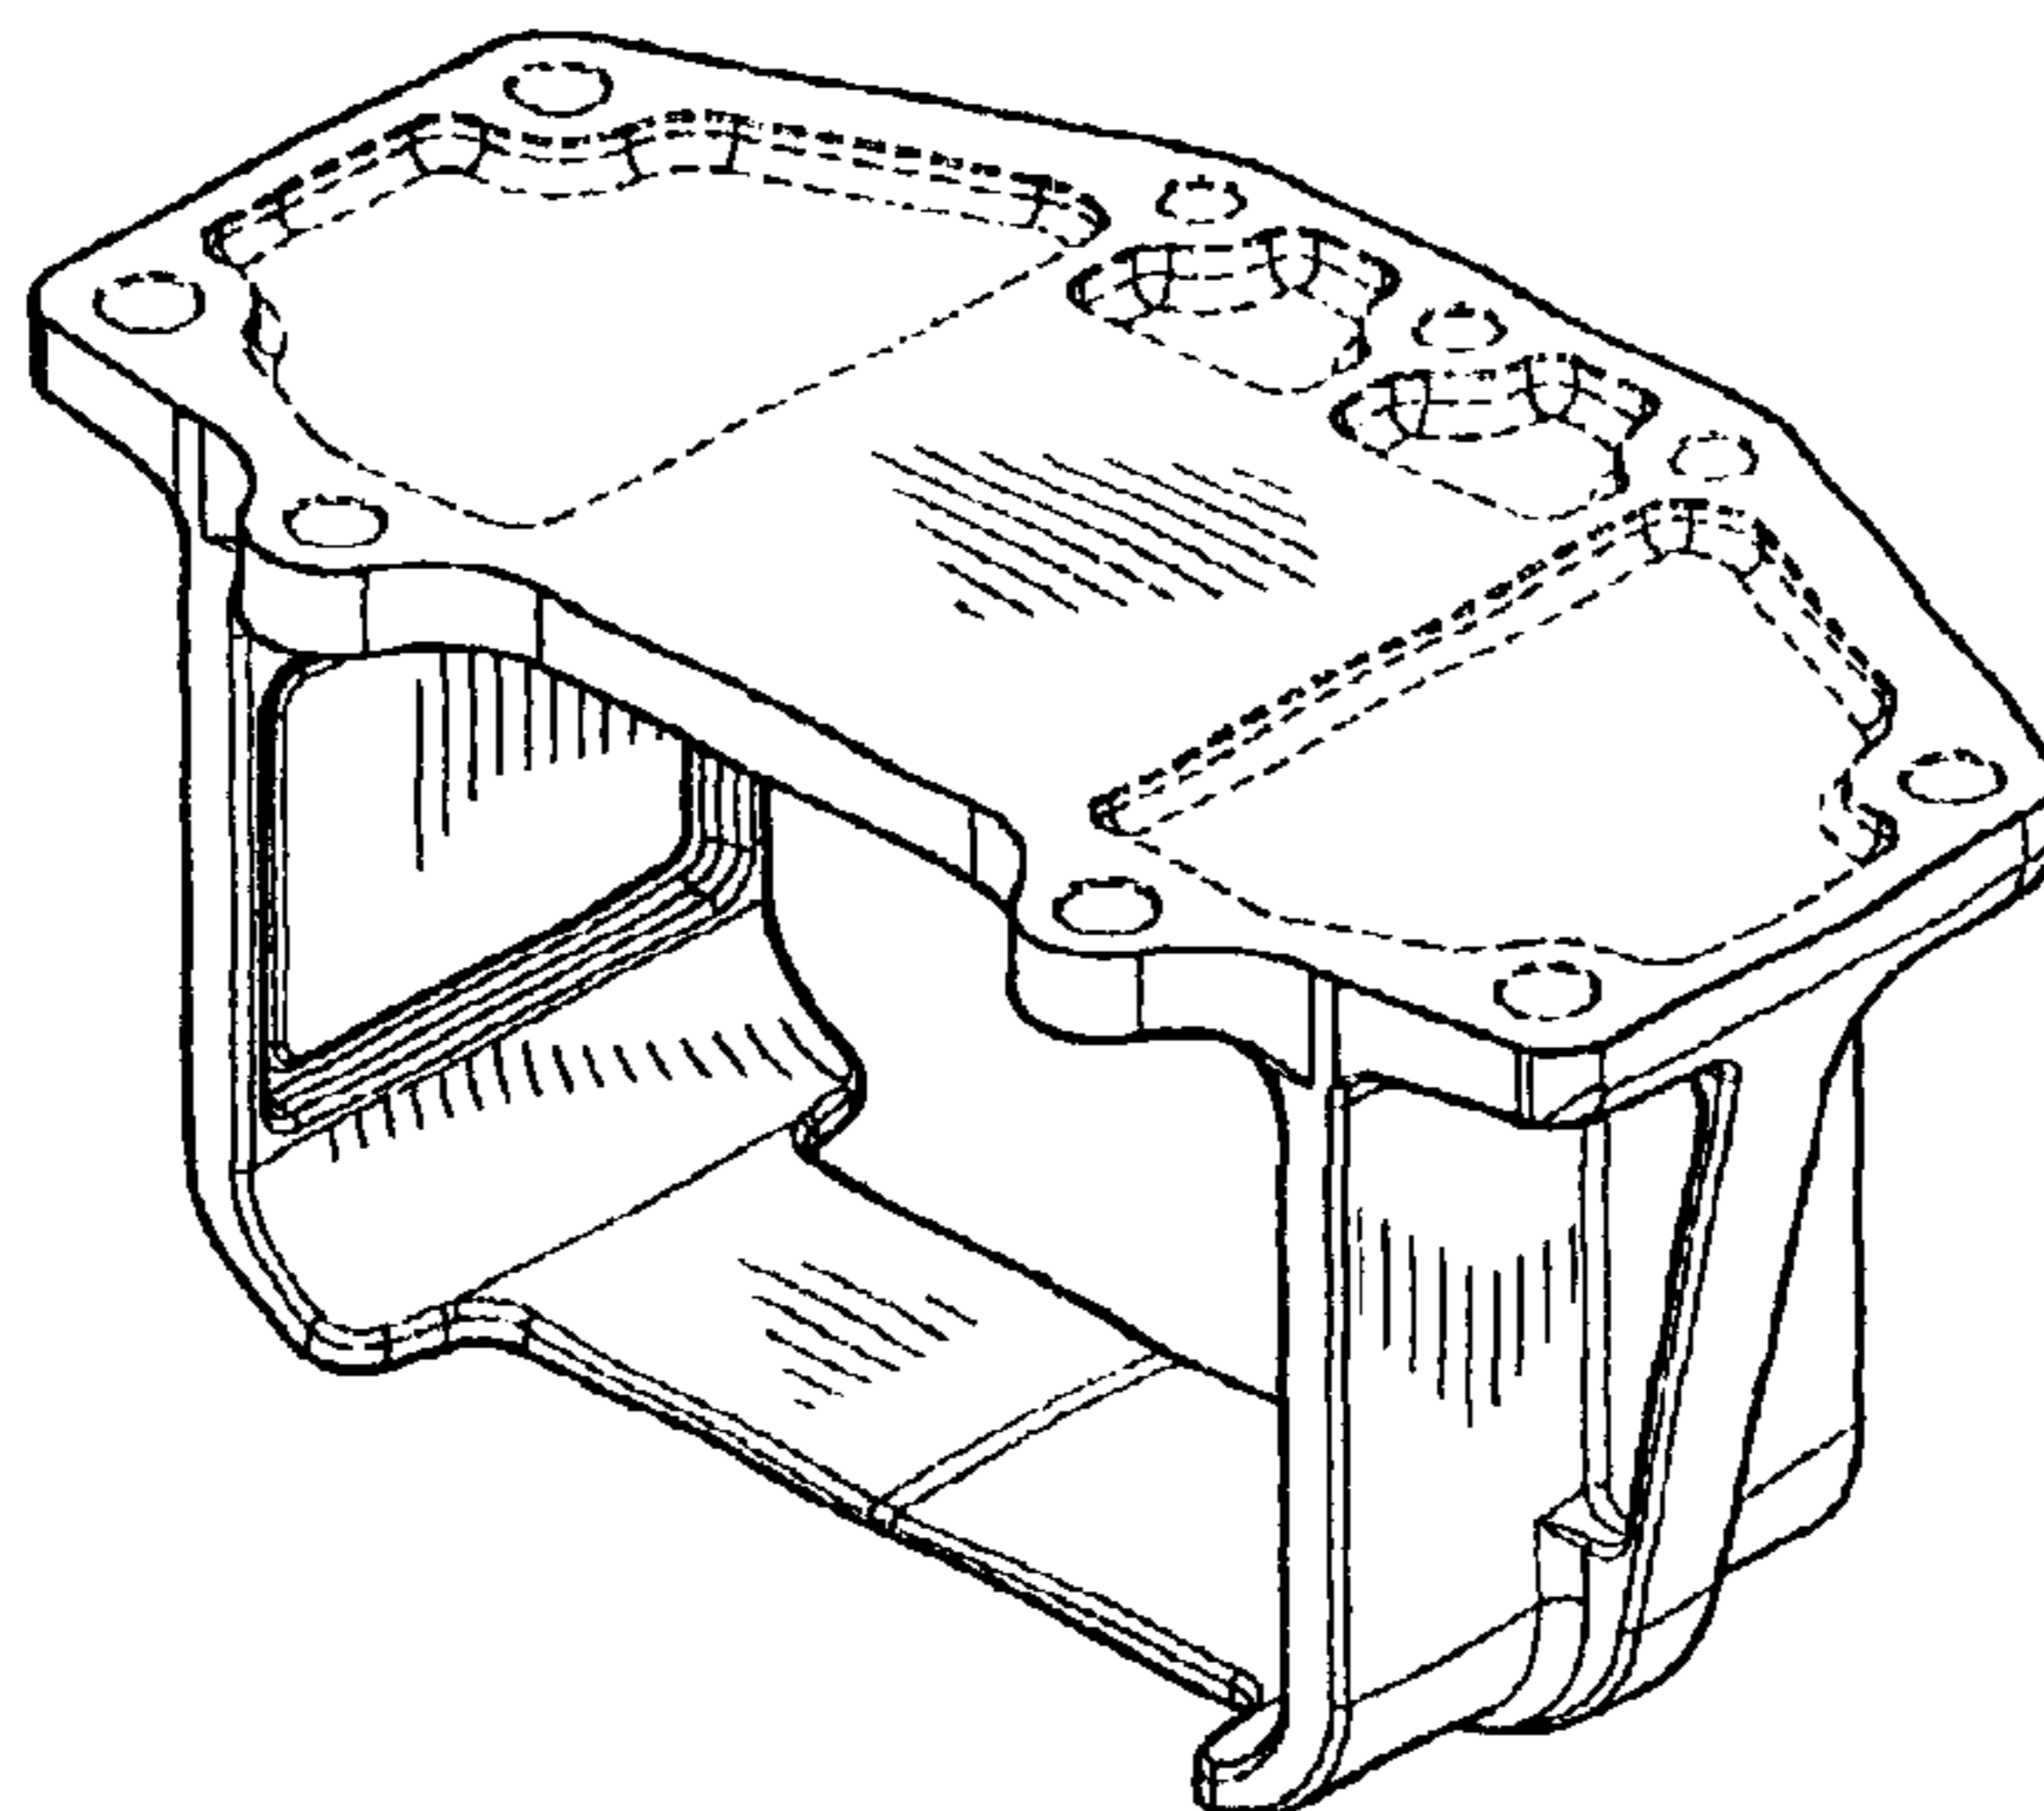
is a perspective view showing the bottom, front, and left side of the spring housing shown in FIG. 1.
